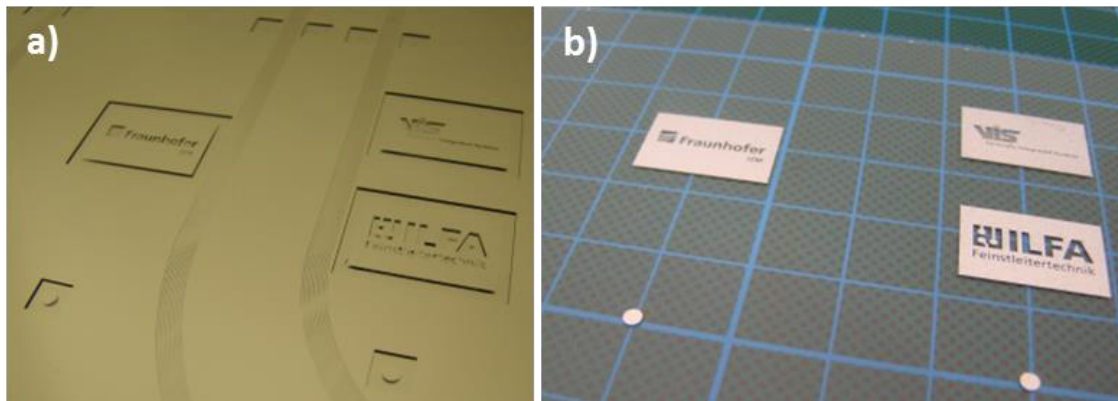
a) Detail of mask layer on glass, b) protected partner logos and fiducial marks after removing aluminium mask layer (Source: Fraunhofer IZM)
